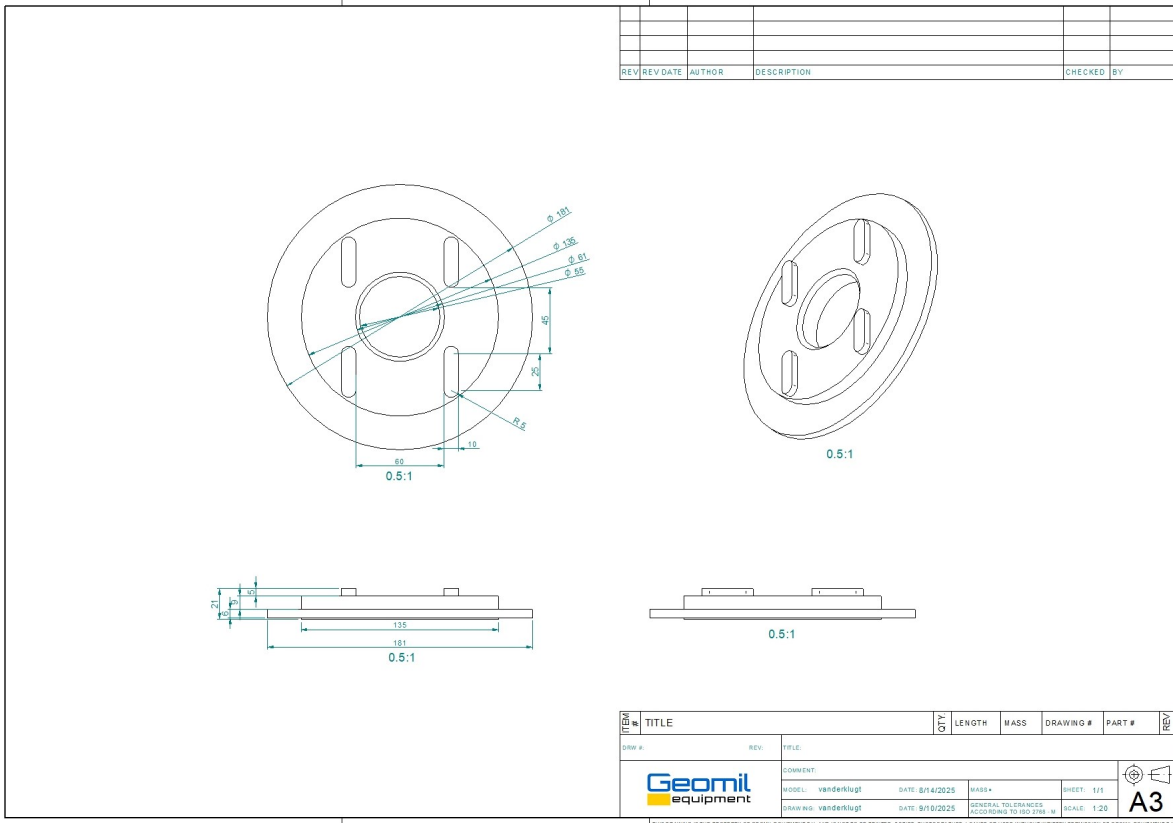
Technical Drawing Of The Guide Plate Of The Raptor.
